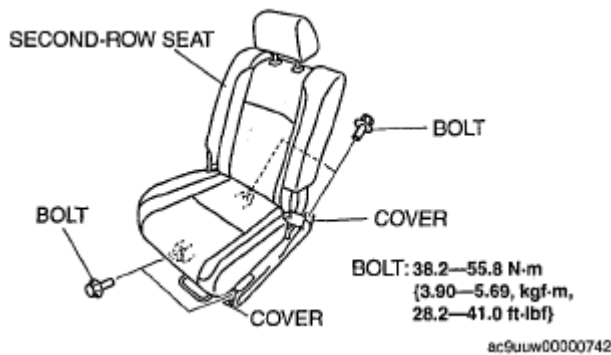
Identifying Second-Row Seat, Bolt With Cover & Torque Specifications
